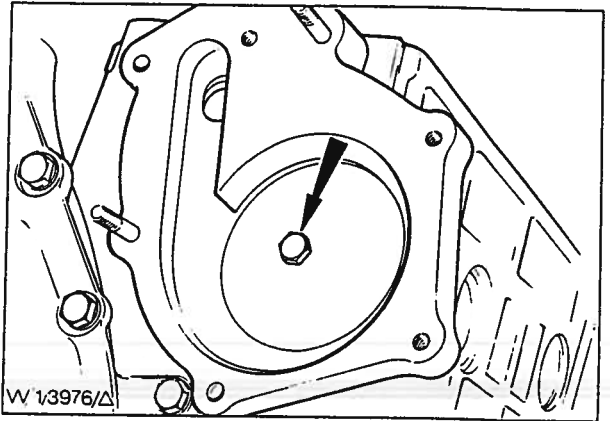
Water Pump Backplate Showing Retaining Set Bolt Behind Pump on 2728T Engine
